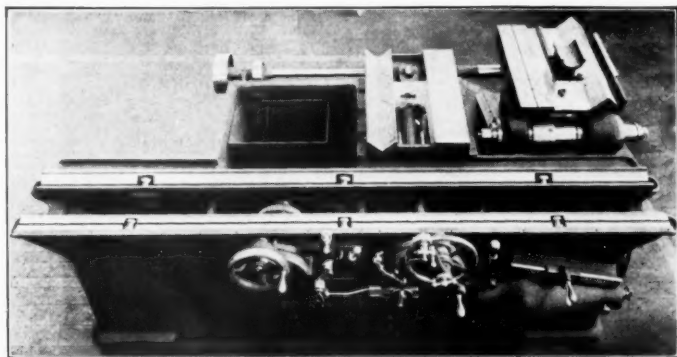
Top view of a grinding machine with spindle removed showing the "V's", tableways and other flat bearing surfaces. Note the roller oilers which serve the former and method of grooving of the latter.
